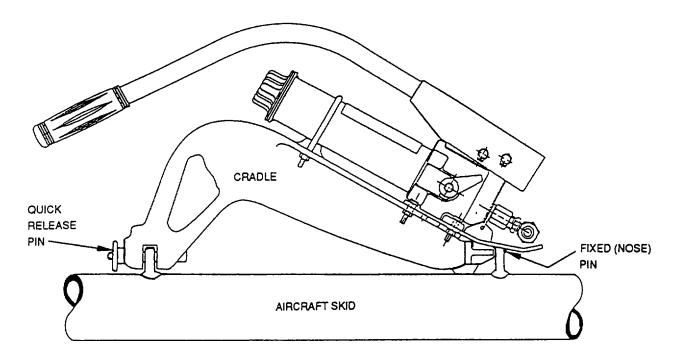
Mechanical Connection Components, Model 214-706-104-101
